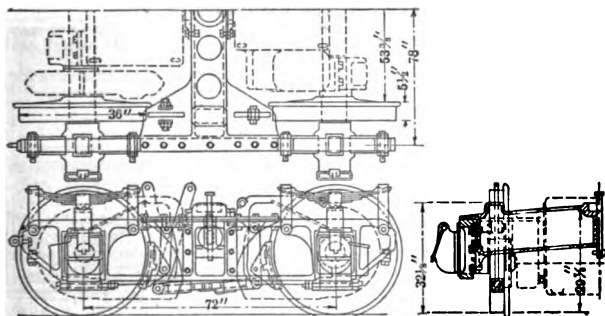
Motor, locomotive-frame, rigid bolster.
